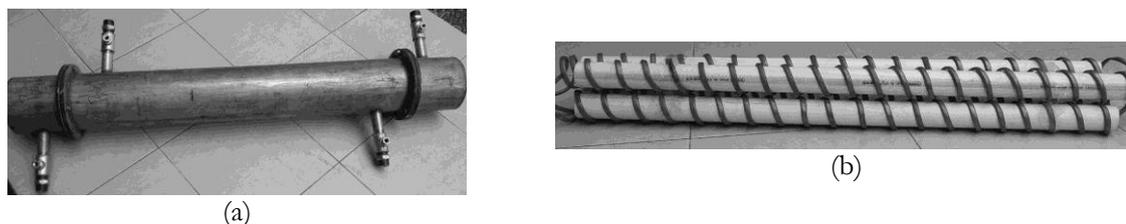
HE Main components; (a) Shell, (b) tube helical coil
